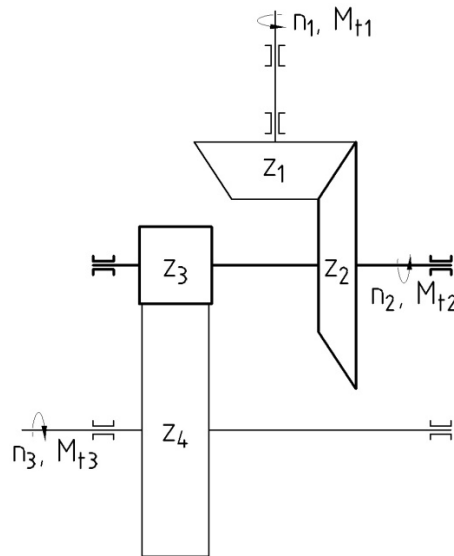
Sketch of the gearbox; the analyzed shaft with gears is marked by darker lines
